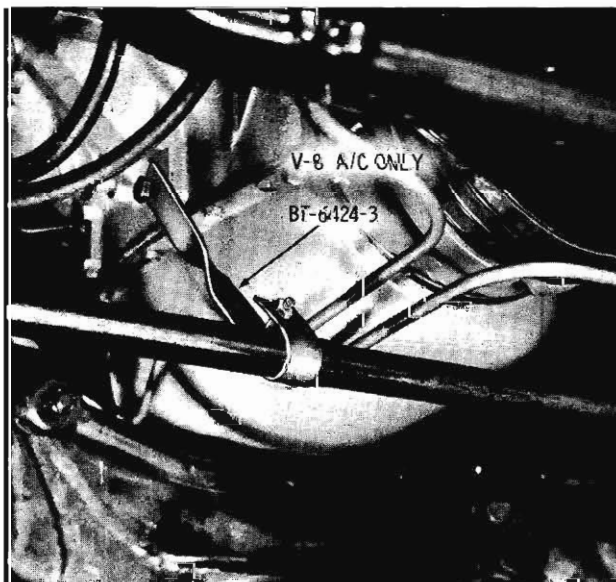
Engine Support Tool BT-6424-3 Adapter
